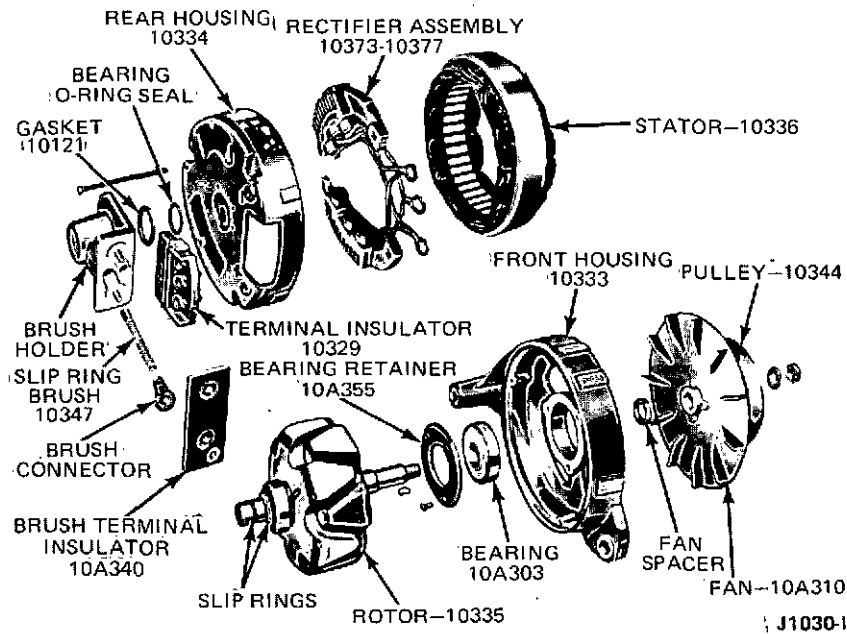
Disassembled 65-Ampere Leece-Neville Alternator
